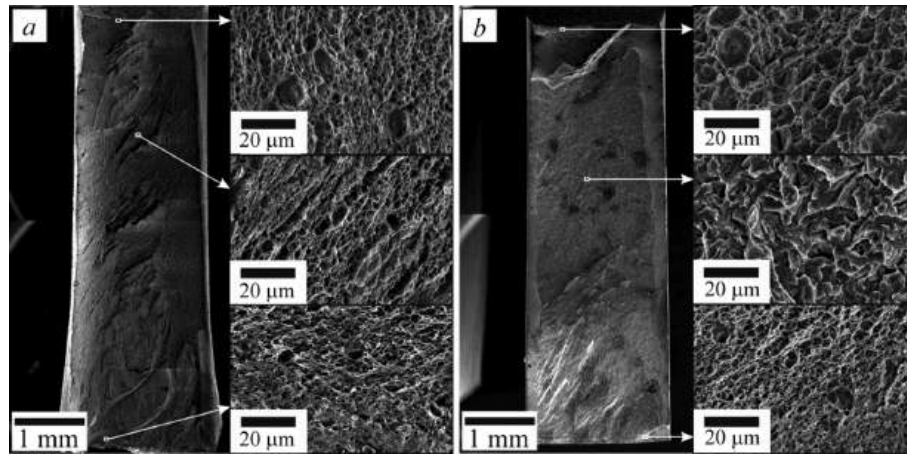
Fracture surfaces of 0.15C steel subjected to FSW and impact tests at 20°C (a) or –196°C (b).
